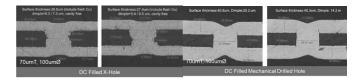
DC Filling of Laser and Mechanically Drill Holes
